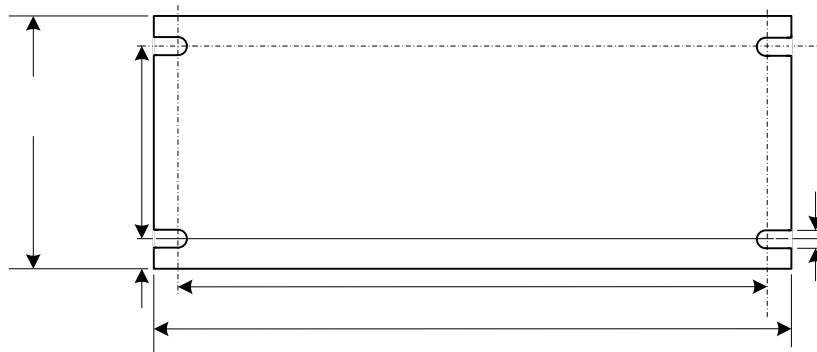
The mounting bolt pattern for the M-2025C and M-2025D
